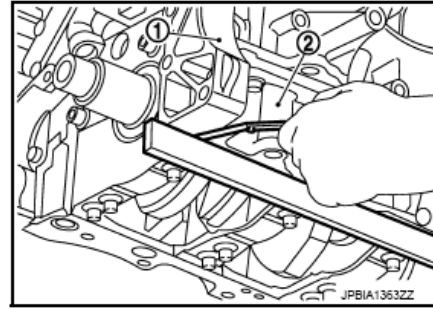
Checking Surface Height Difference Between Rear Timing Chain Case To Lower Cylinder Block Using Feeler Gauge
